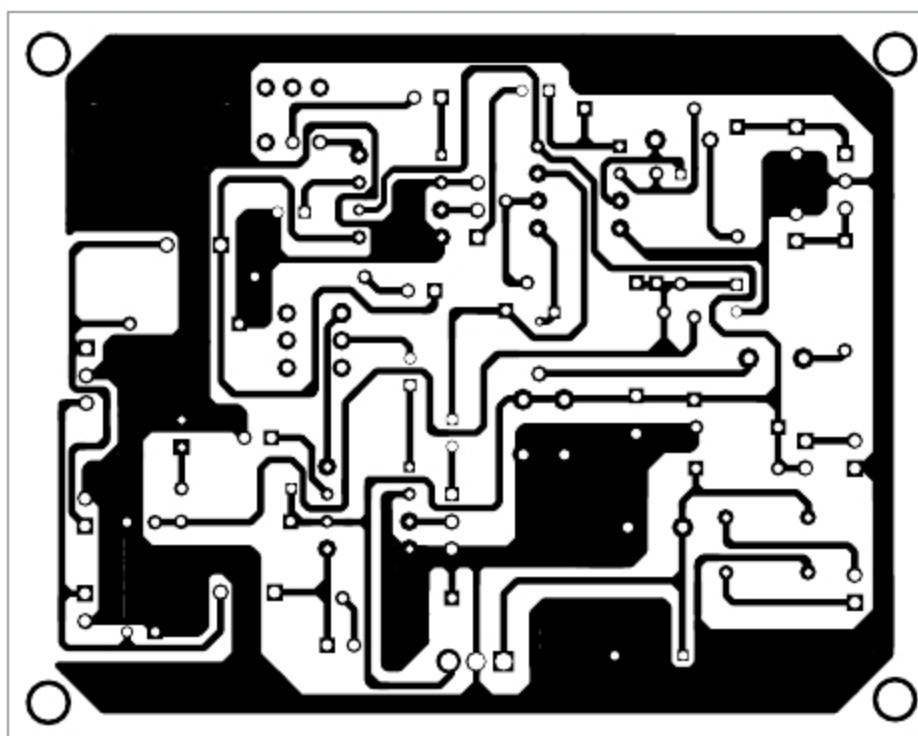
Actual-size PCB layout of universal audio signal tracer and tester
